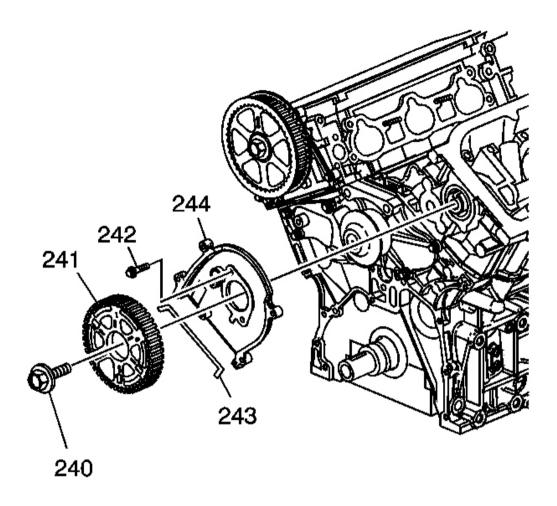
View Of Camshaft (CMP) Sensor Courtesy of GENERAL MOTORS CORP.
